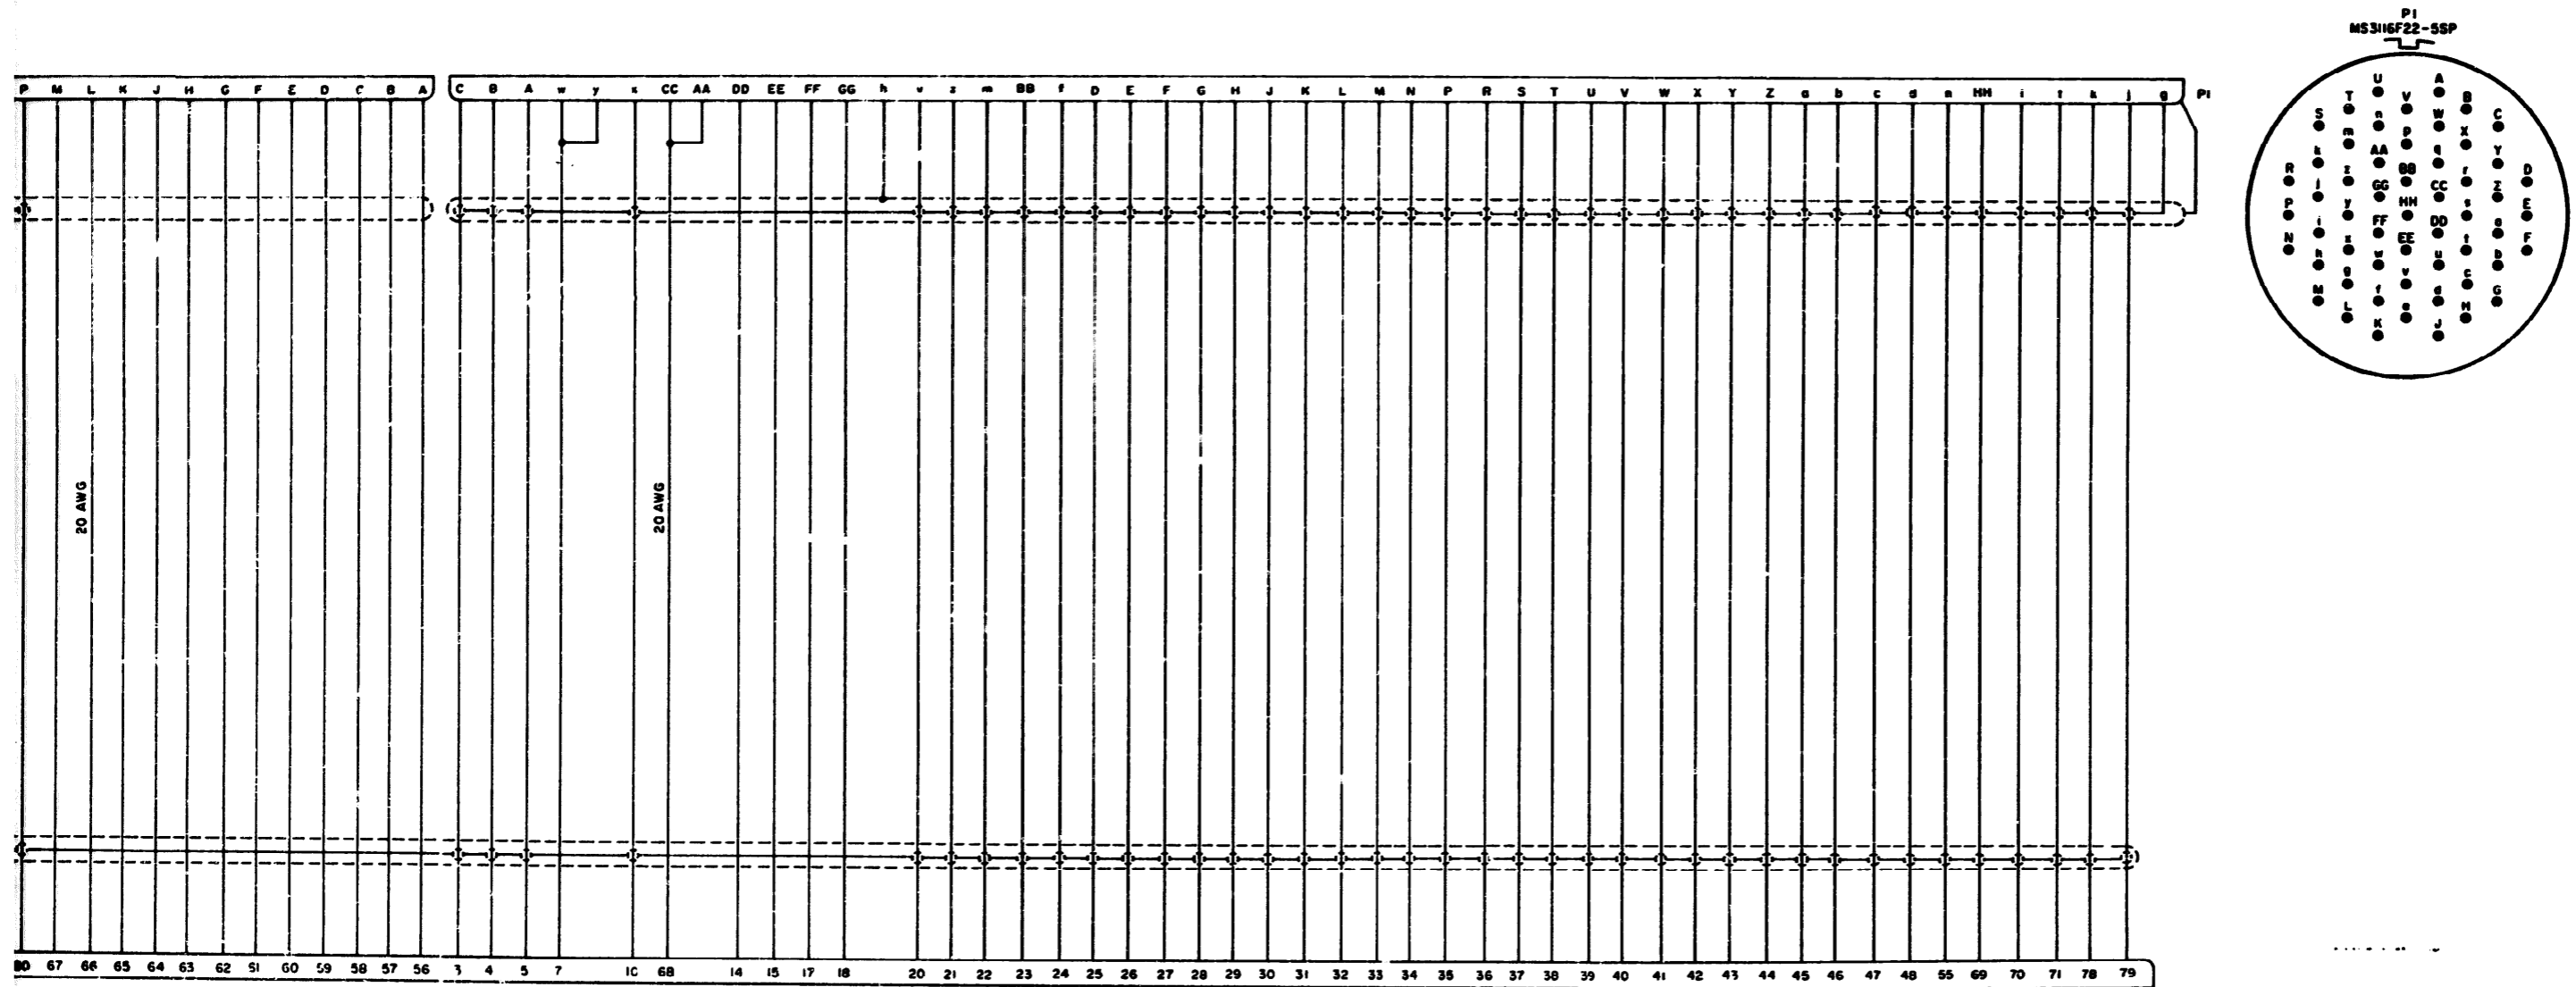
Cable Assembly, Special purpose, Electrical, Branched CX-12716/AYM-8, wiring diagram.
